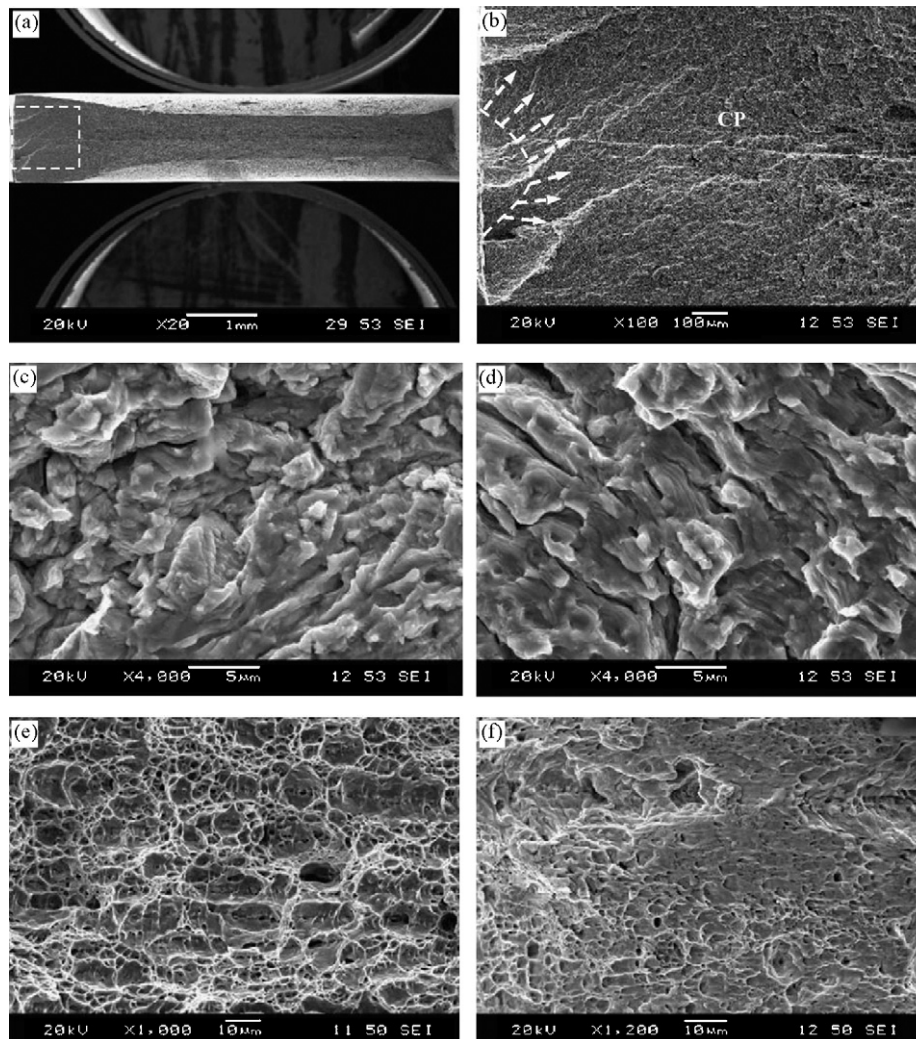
Typical SEM micrographs of fatigue fracture surface of welded joints tested at a stress amplitude of 225 MPa, (a) overall view of the fracture surface at a low magnification, (b) magnified view of the dashed box in (a) showing crack initiation site and crack propagation area at an intermediate magnification, where CP indicates crack propagation region and the arrows indicate the direction of the crack propagation, (c) crack propagation area close to the crack initiation site at a higher magnification, (d) crack propagation area at about 2 mm from the crack initiation site at a higher magnification with secondary cracks, (e) center of the fracture surface, and (f) near-edge area on the fracture surface.
